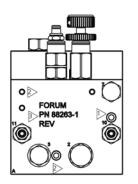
88229-1 Pneumatic Control valve Assembly
